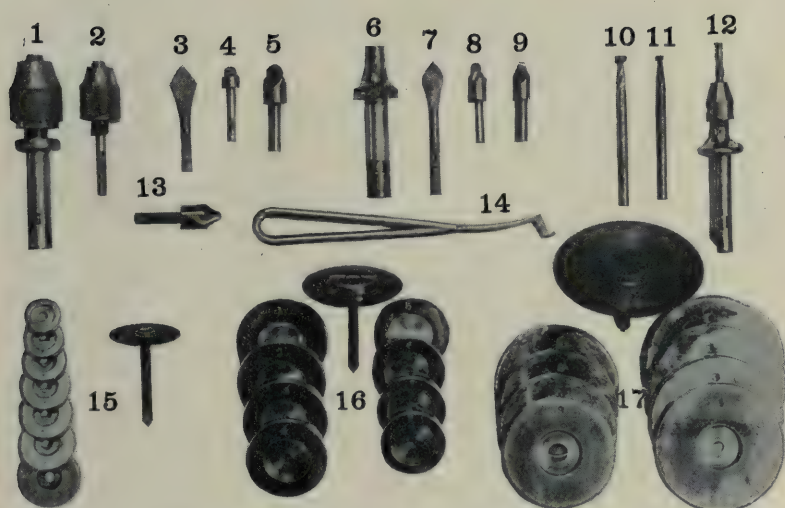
, 2, 6, Chucks. 3, 7, Conical cutters. 4, 5, 8, 9 Ball and cone cutters. 10, 11, 12, Fraises.
